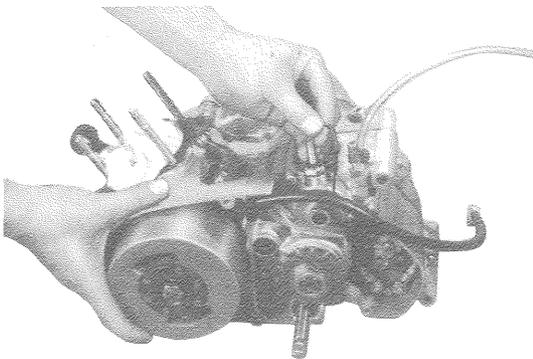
Disconnecting neutral indicator switch wire
